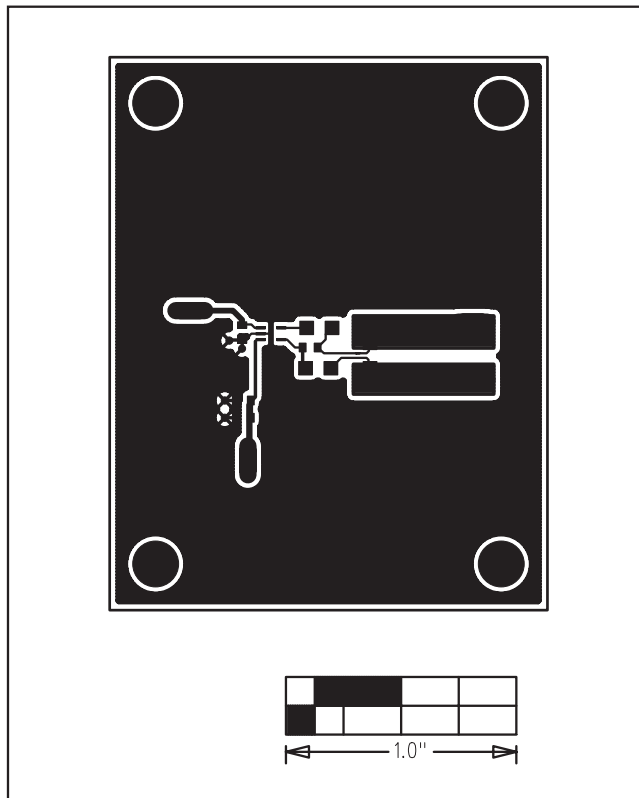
MAX9937 EV Kit Component PCB Layout—Component Side
